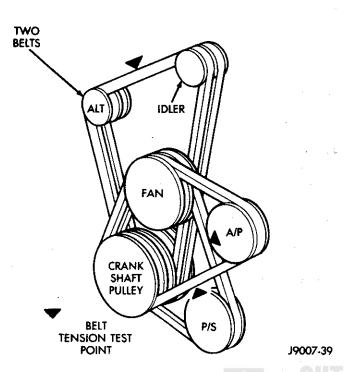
Alternator, Air Pump and Power Steering—3.9L, 5.2L and 5.9L Engines
